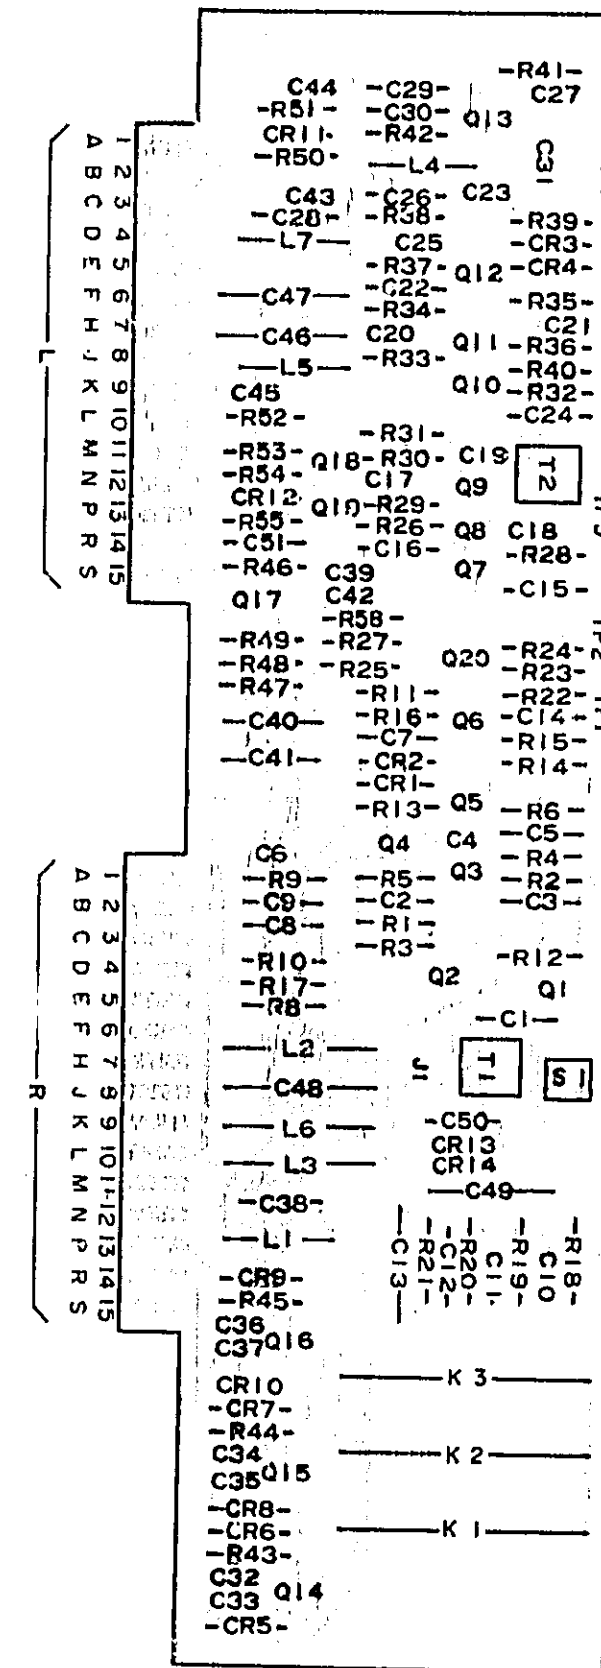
A11 Null Detector Board Assembly Component Locations.
